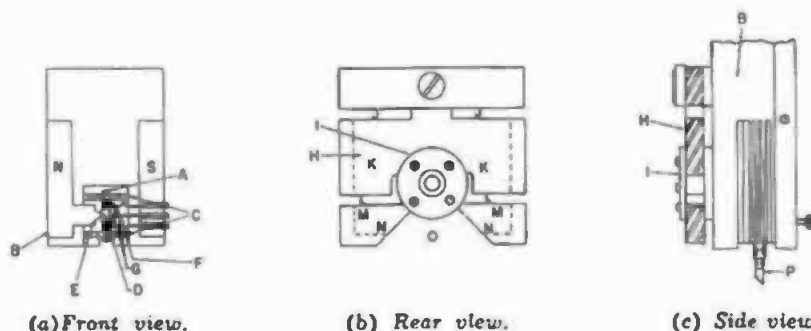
Interior view of typical monophonic balanced-armature cutting head, showing the damping springs and damping materials.
